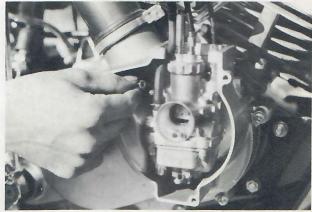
Disconnecting fuel line vacuum tube and over flow pipe
